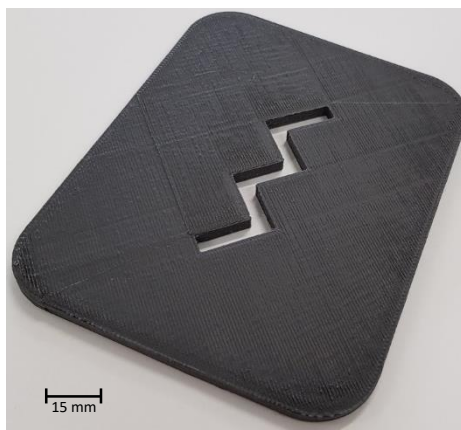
3D printed magnetic iron PLA filter with zigzag pattern.
